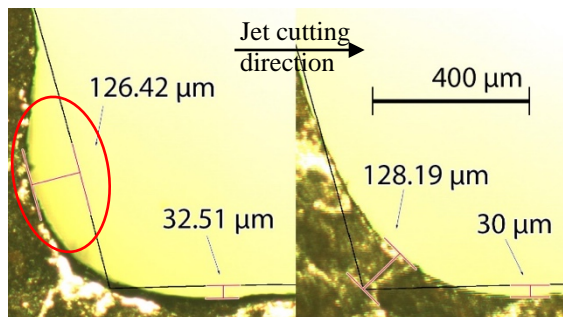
Bottom geometry Side C undercut of gear B; feed rate 36 mm/min (left image) and 11 mm/min
